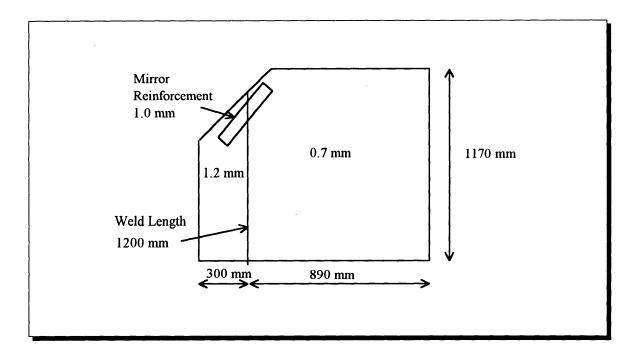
Front Door Inner - Steel Tailored Blank Design.
